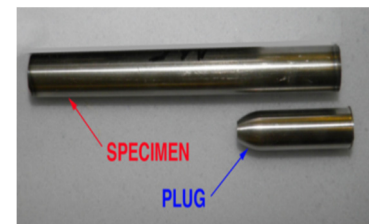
Tensile specimen with filler plug used to provide solid end grips.
